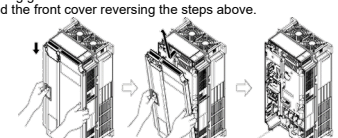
Removal of the Front Cover and the Wiring Guide (for VF1A-G72A0S4)
